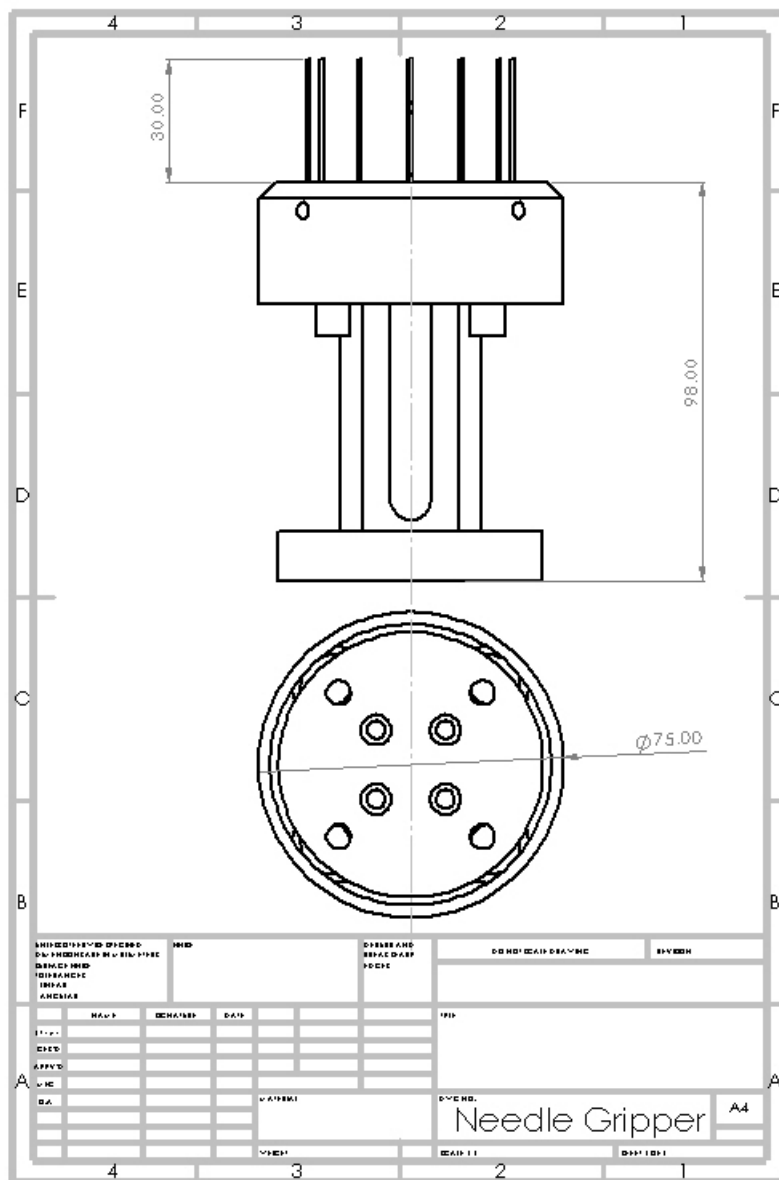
Drawing of the complete needle gripper with its main dimensions
